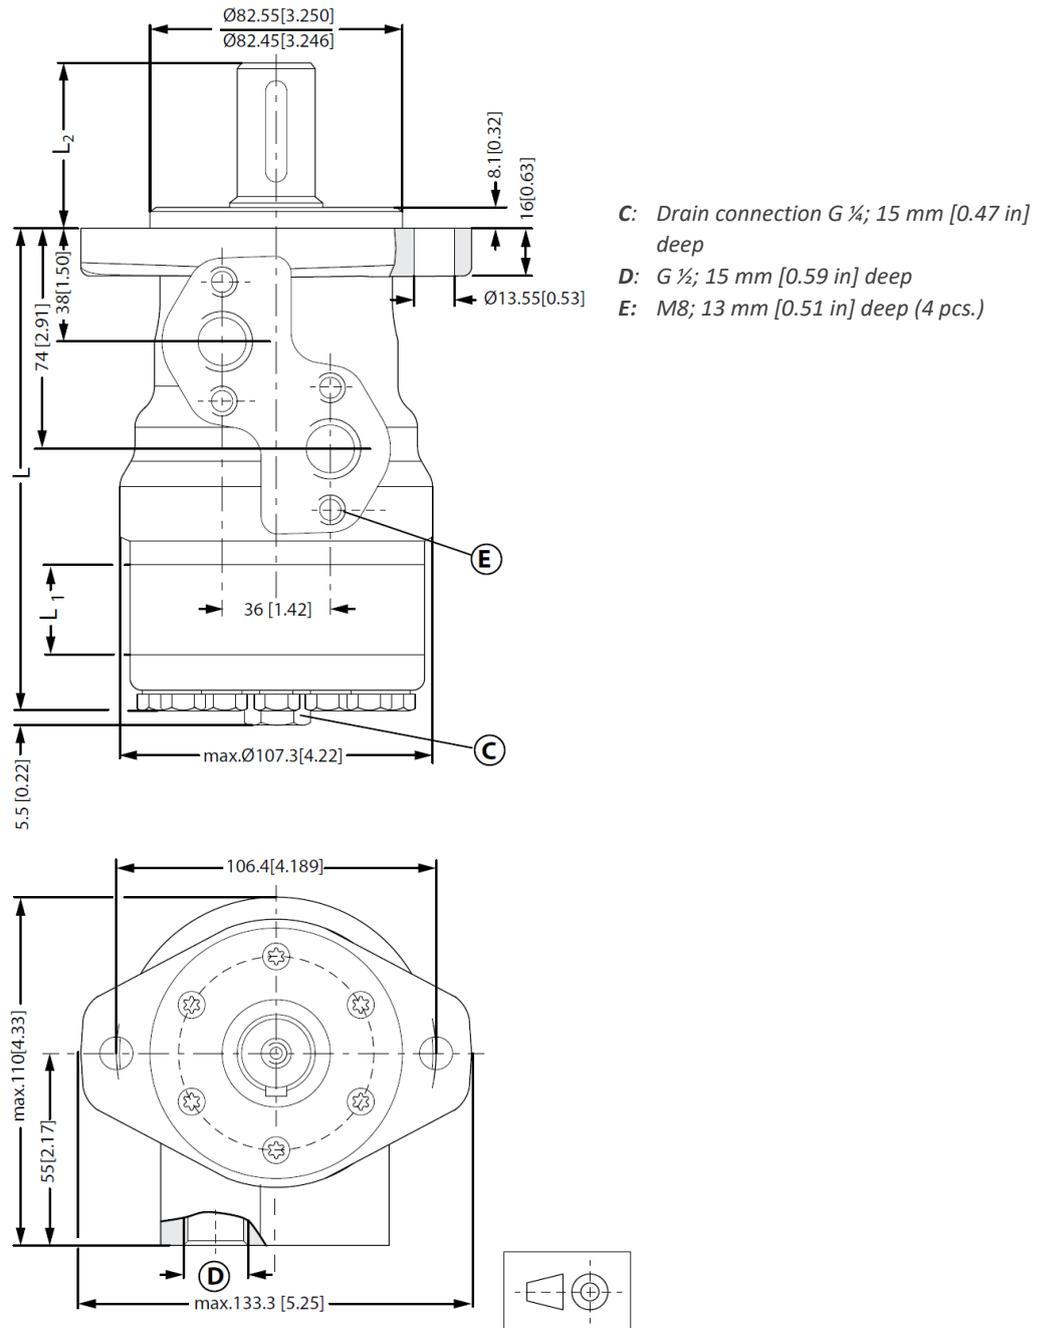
OMR, OMR C and OMR N Side port version with A2 flange (EU version)
